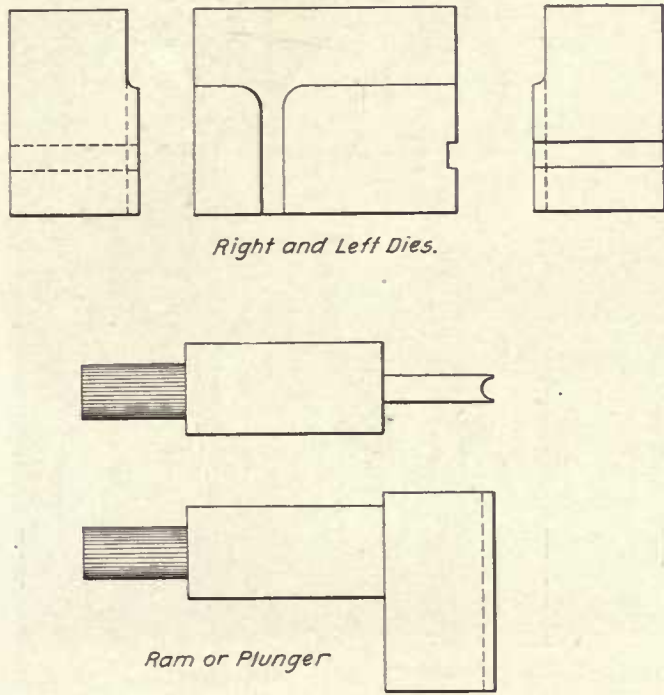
Dies for Welding Fork on Clinker Rakes.
